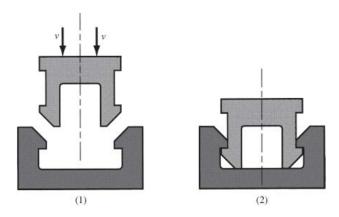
Snap fit assembly, showing cross sections of two mating parts: (1) before assembly and (2) parts snapped together
